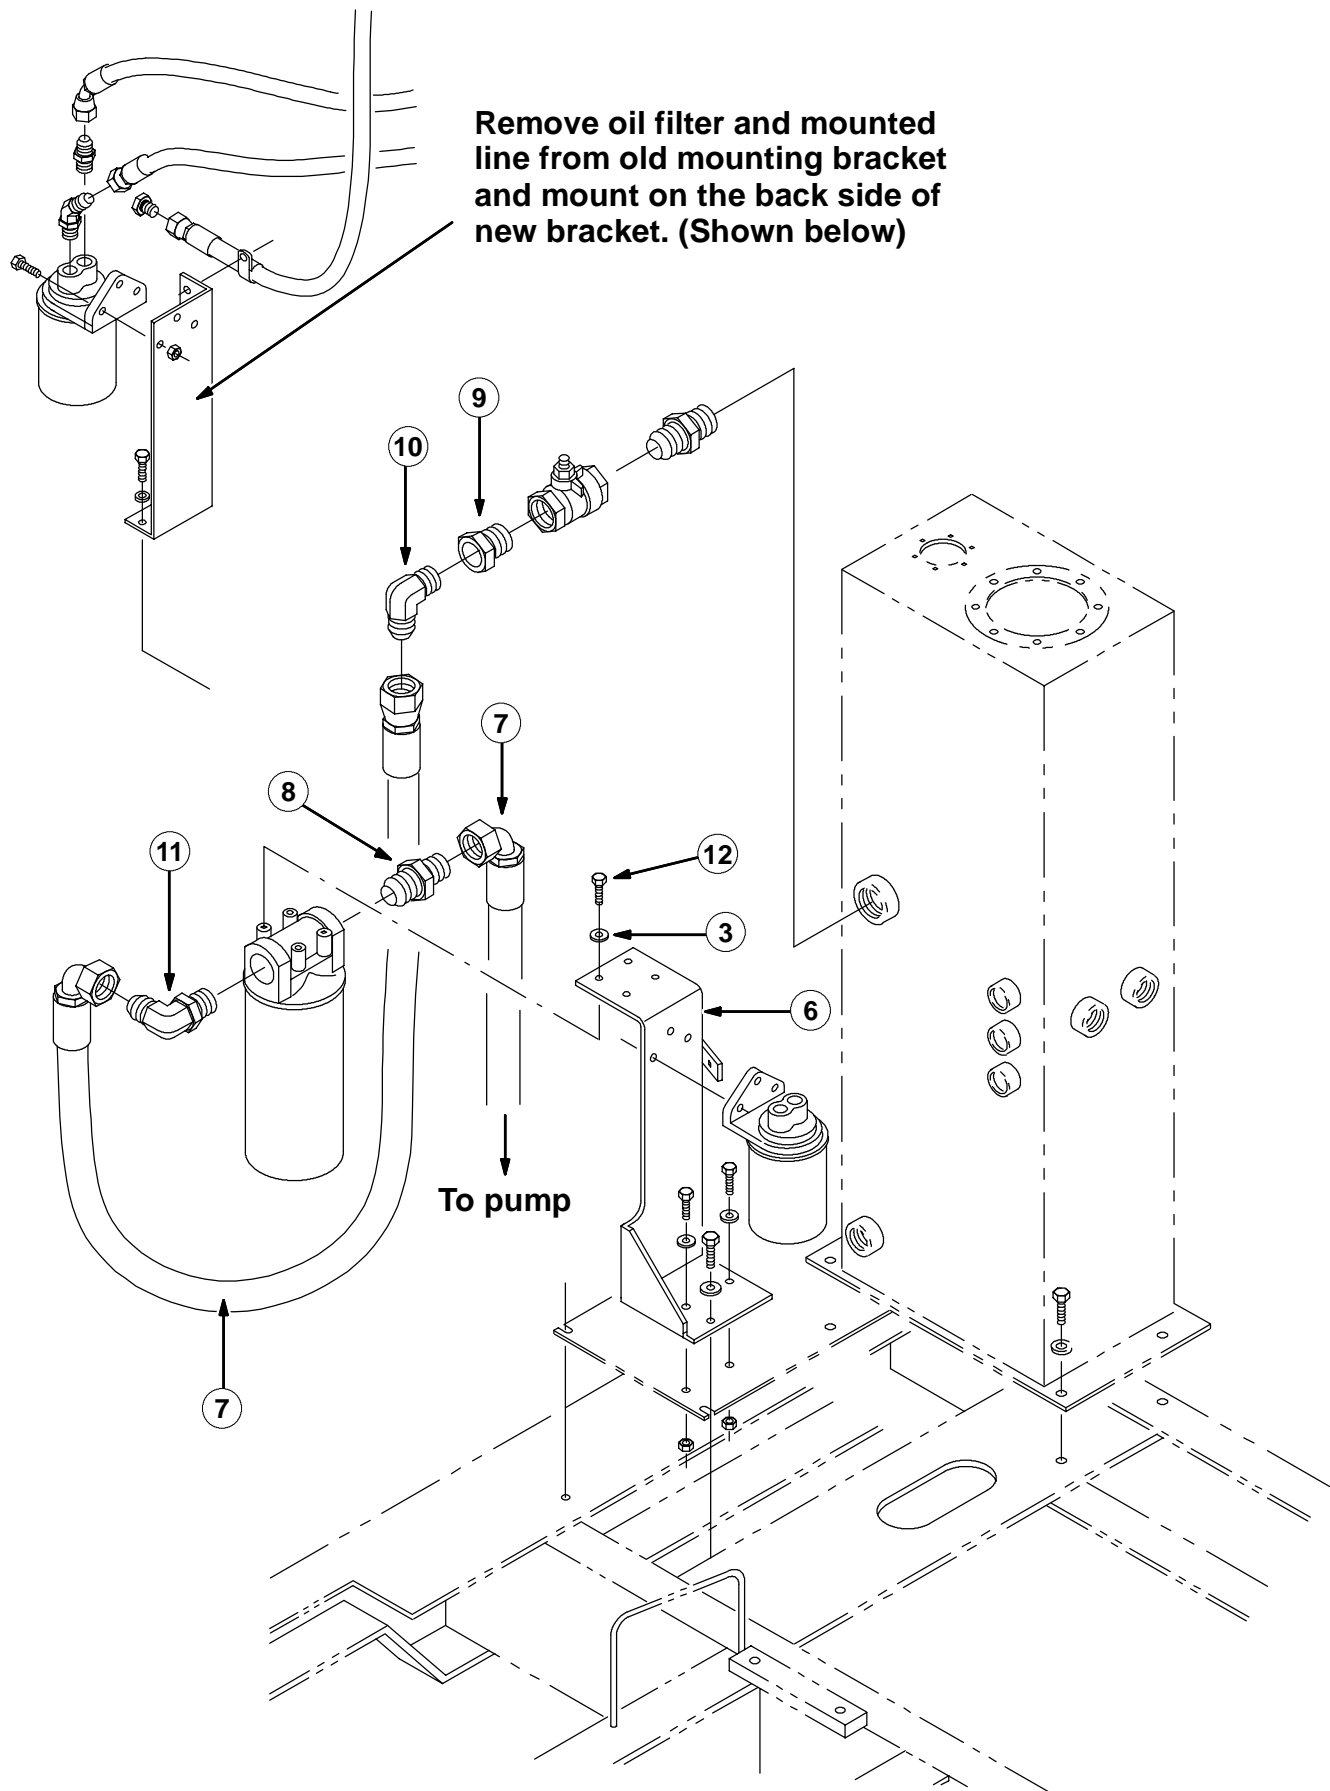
NEW MOUNTING BRACKET INSTALLATION
